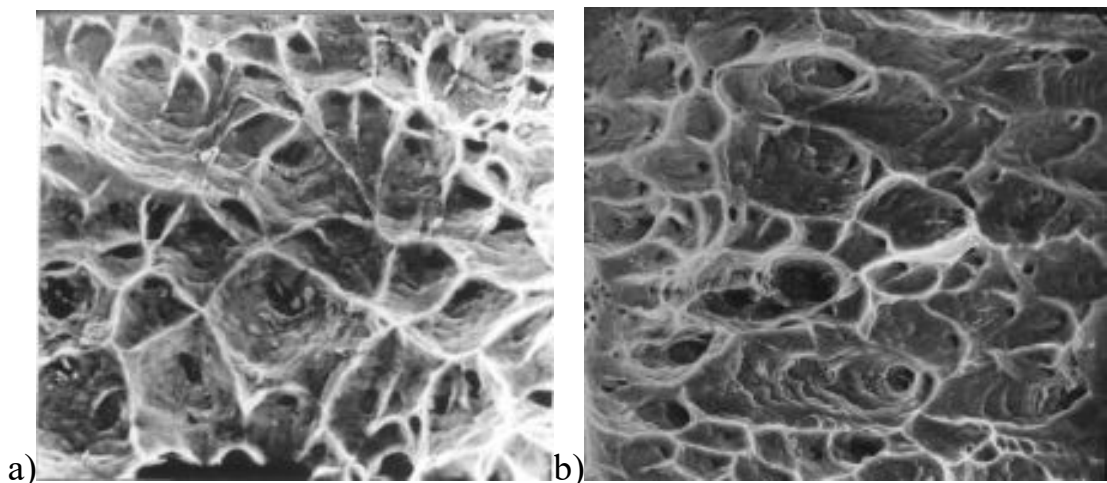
Scheme of ductile fracture with the formation of a pitted fracture surface at: a) uniaxial tension, b) eccentric tension, c) -pits[53].
